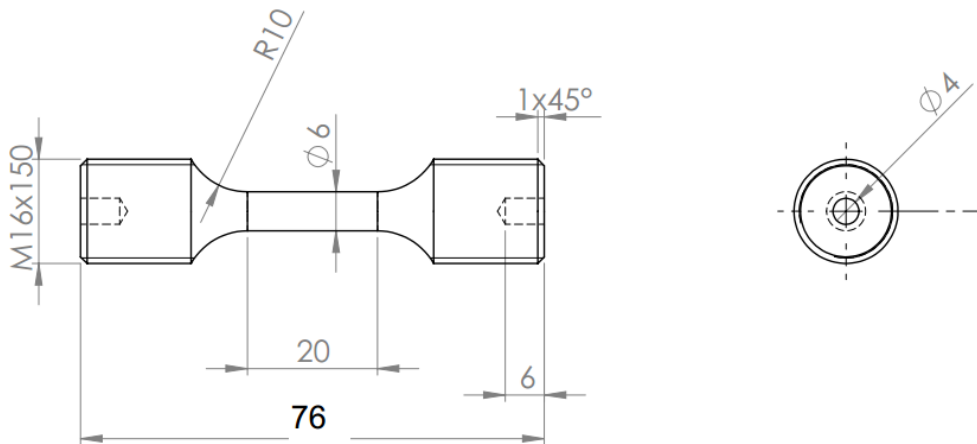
8 Geometry of cylindrical specimen for the tensile test.
